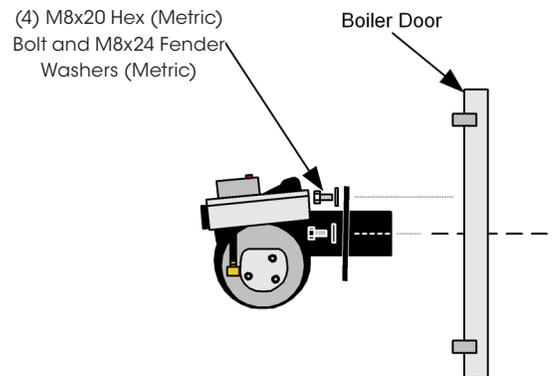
OWB-9 and OWB-15 chamber swing door burner mounting
